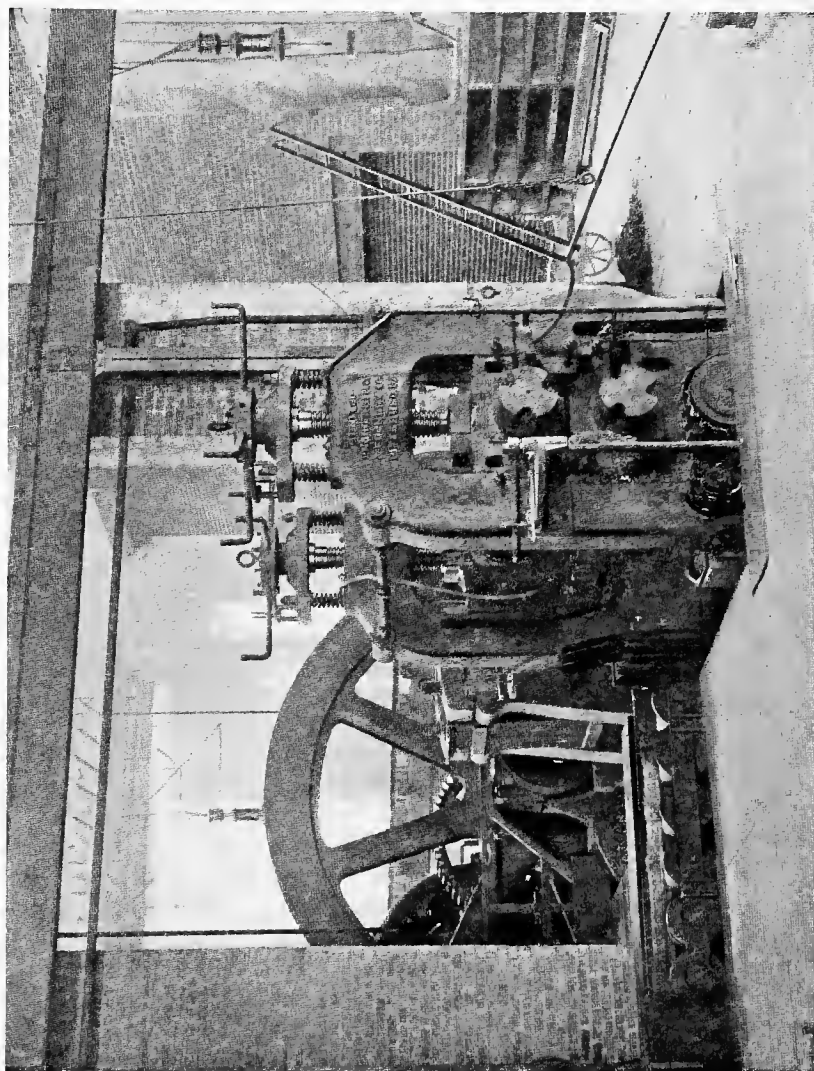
Typical 20-inch Merchant Mill installed by The United Engineering and Foundry Company. (Motor Driven.)
